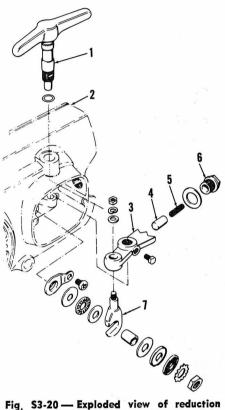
Exploded view of reduction shifter assembly used on TC120 models.
